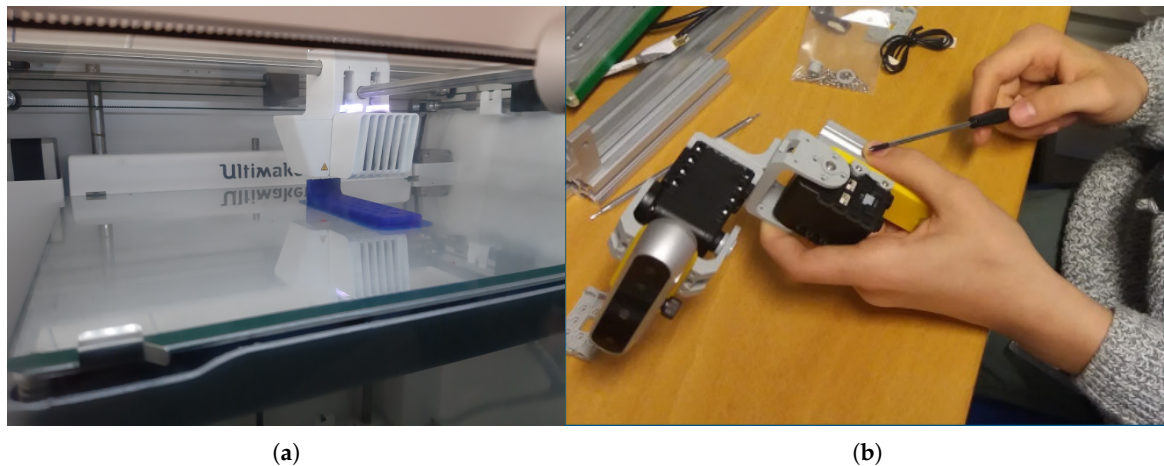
Students assembling their printed tool: The students also learn about how 3D printers work as they print their piece (a) printing tools in 3D; (b) assembling the tool in the robot to solve the missions.
